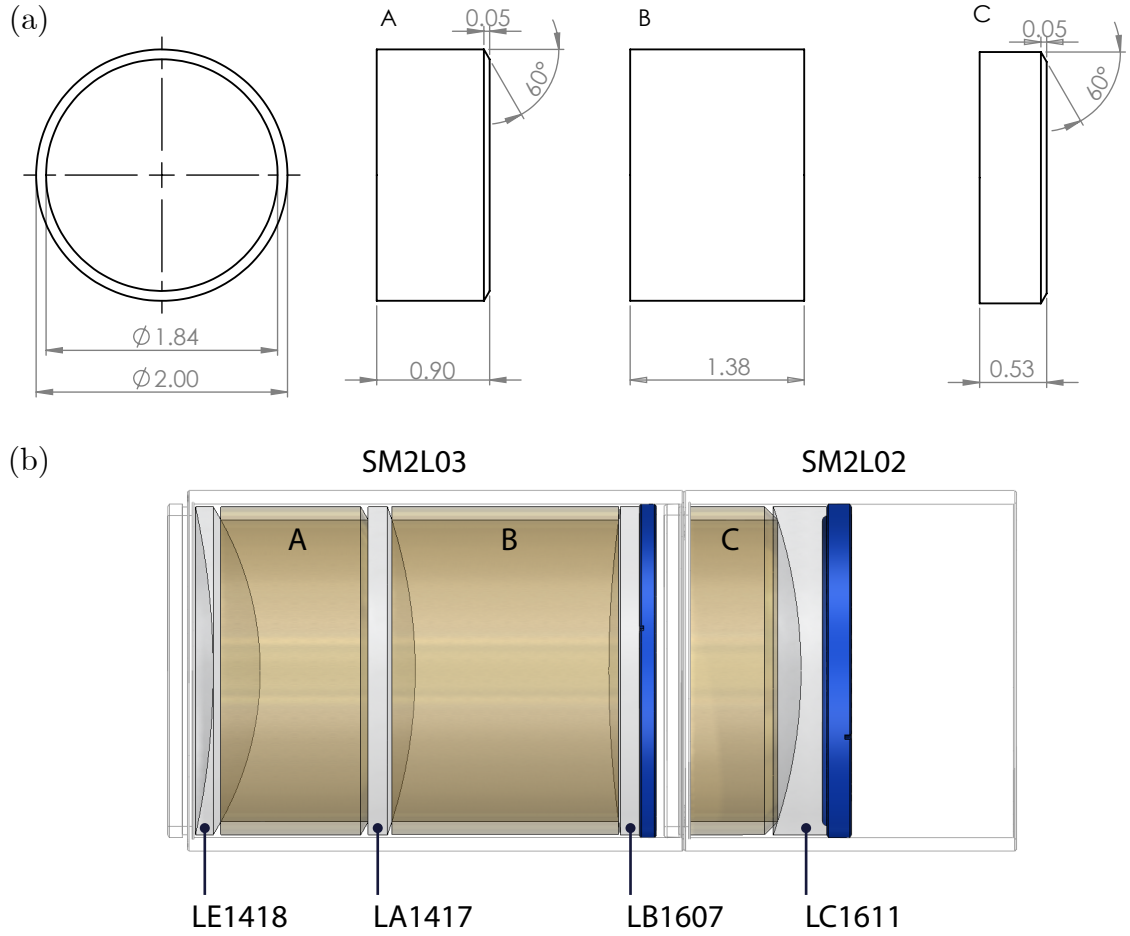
Objective assembly. (a) Measurement of brass spacers. (b) Lenses and spacers in their housing made of stock Thorlabs lens tubes.
